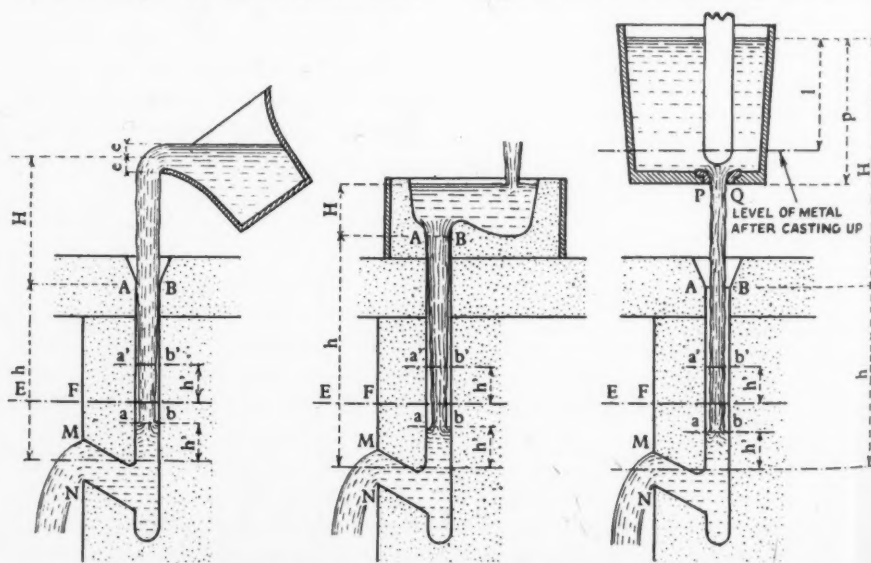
Three filling methods with gating at the upper level of mold cavity. (Left) Tipping ladle pouring directly into the downgate. (Center) Ladle feeding runner basin. (Right) Pouring by means of a bottom-pouring ladle.
